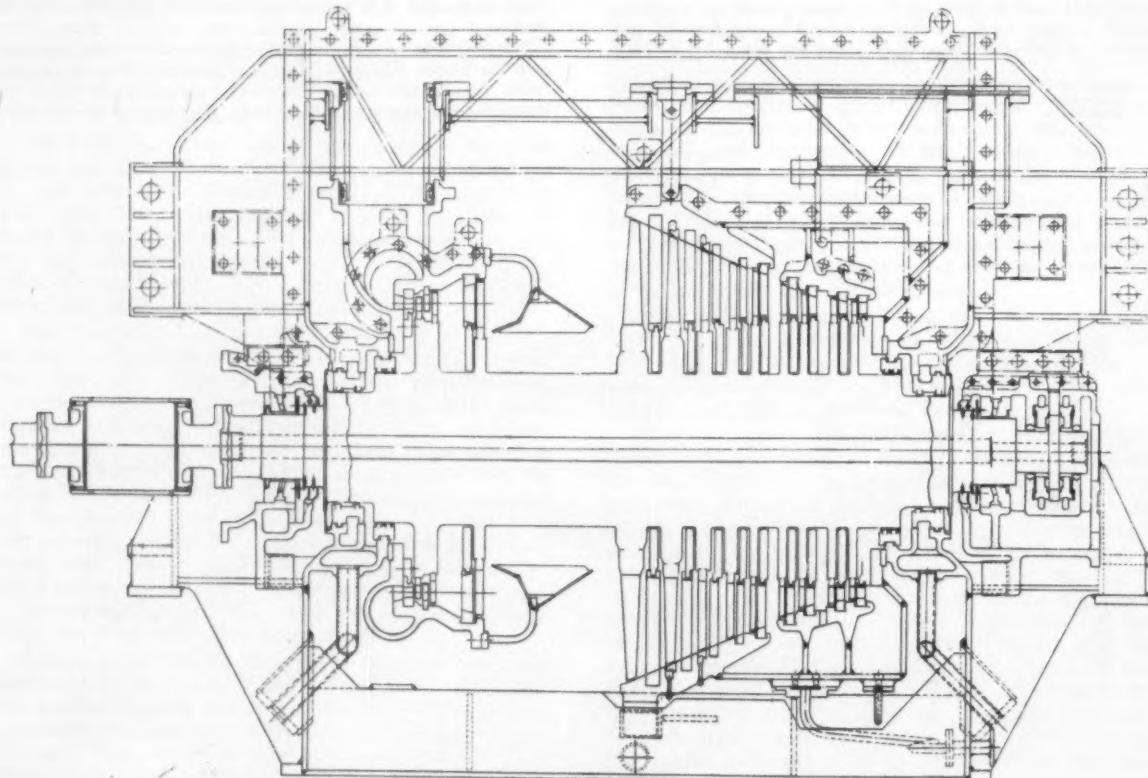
Prototype LP turbine for set of 22,000 ship machinery
